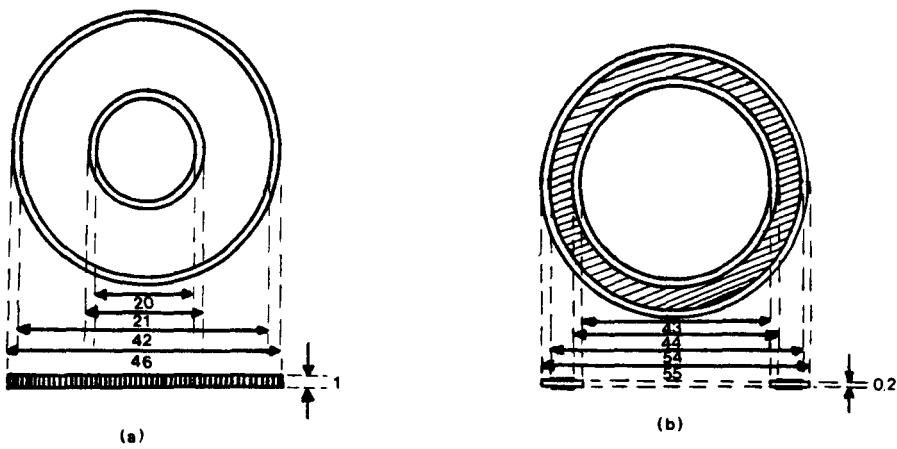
a. Dimensions of the channelplates in mm. The hole is meant for the primary ion beam.
